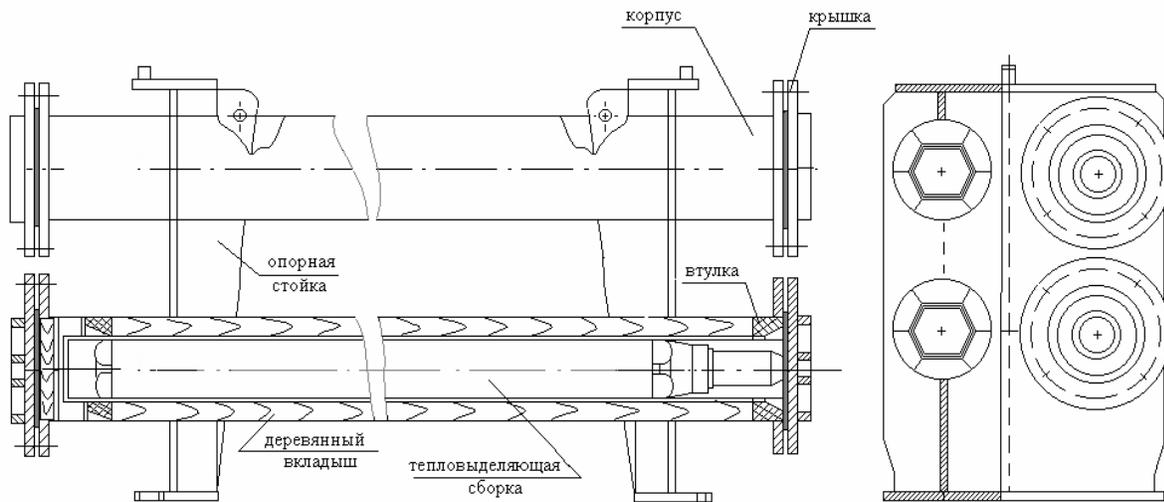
Schematic Structure Drawing of Air Transportation Package.
